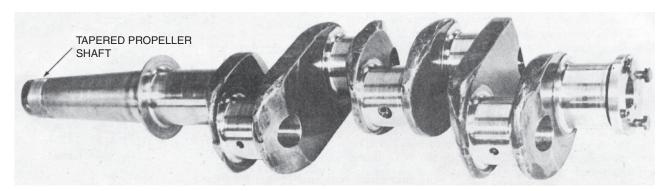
Four-throw crankshaft with a tapered propeller shaft.
